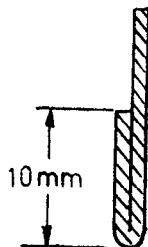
ENLARGED DETAIL OF KNIFE EDGE
